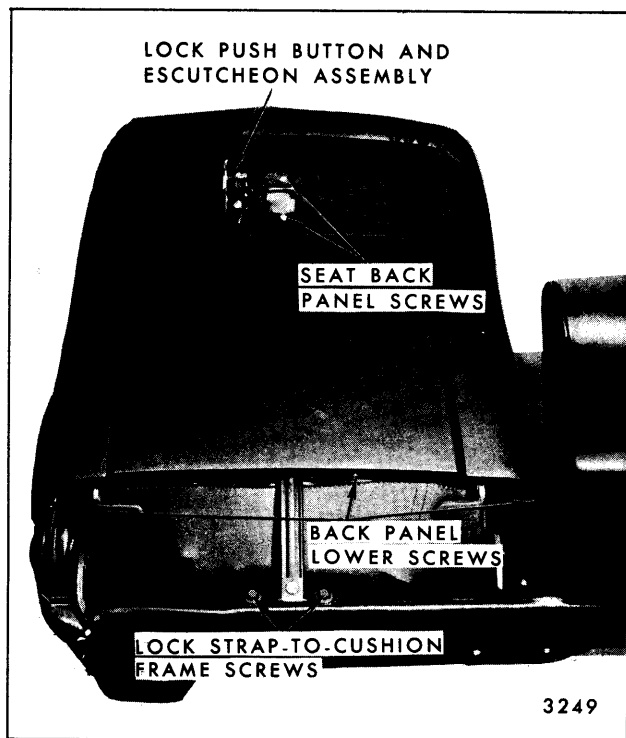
Strato Back Panel Removal - Strato Folding Seats (Except Reclining Seat)
